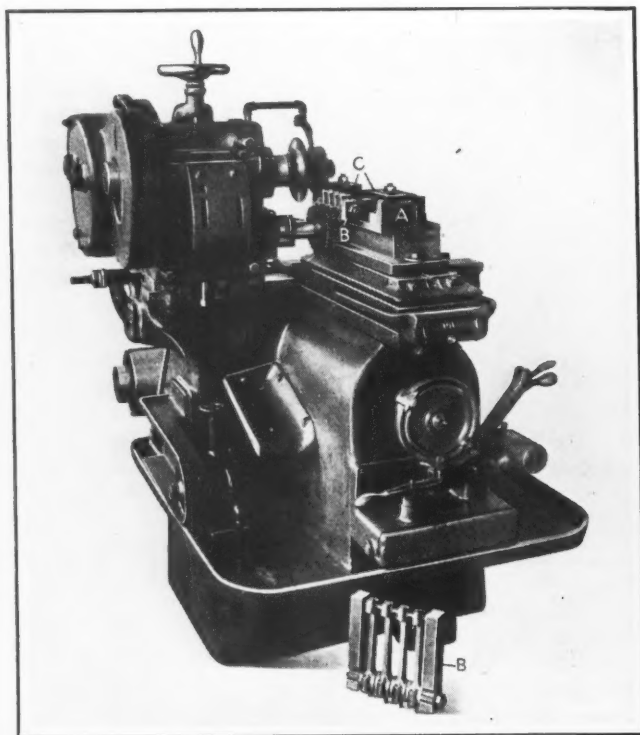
Automatic Milling Machine equipped with Two-spindle Head for performing Milling Operations on Chevrolet Engine Connecting-rods
